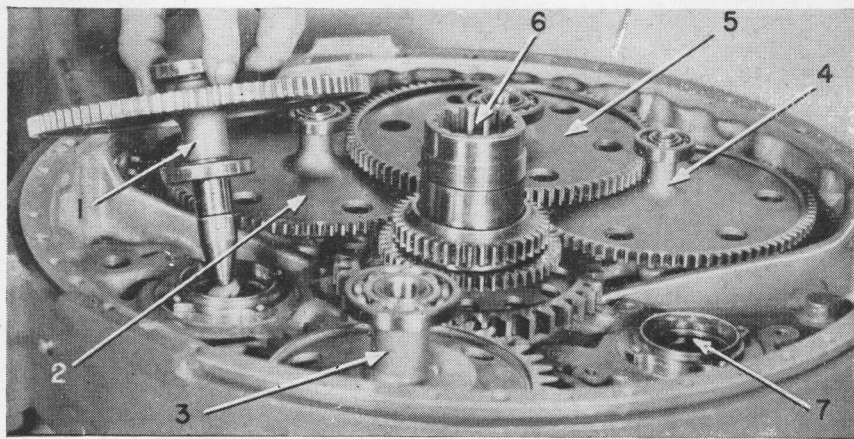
TG-180 accessory gear case (rear), with cover removed, showing (1) hydraulic pump; (2) lubrication pump; (3) starter-generator; (4) tachometer generator; (5) fuel pump; (6) spline to front of compressor rotor (full engine speed); and (7) fuel-control regulator gear bearing (gear removed).
